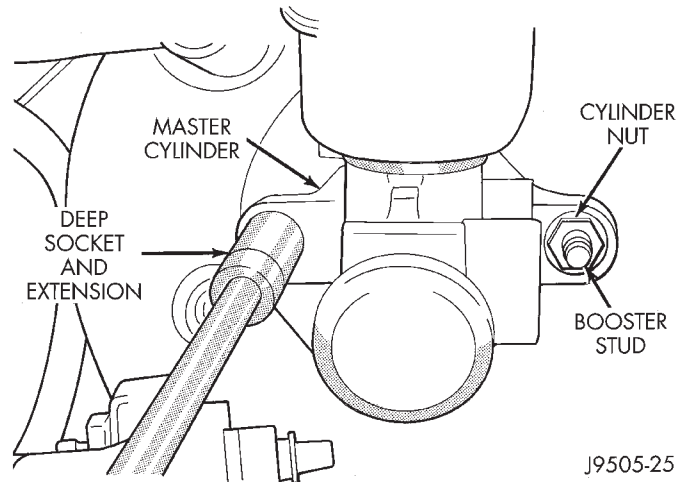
Master Cylinder Attaching Nut Removal/Installation
